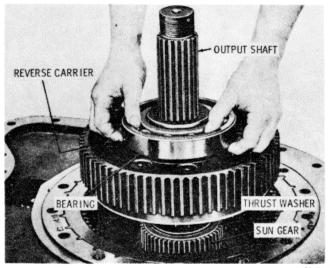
Removing Reverse-Gear Planetary Carrier and Bearing
